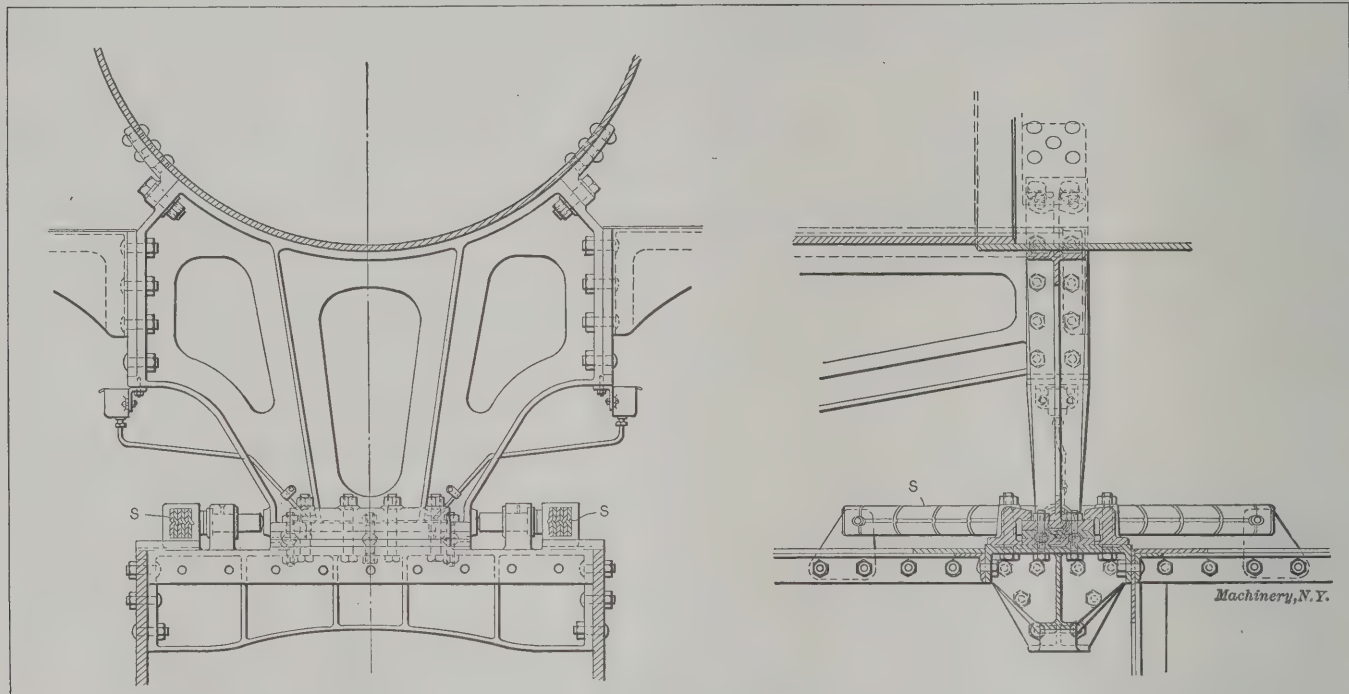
Boiler Support which rests on the Rear End of the Front Frame
